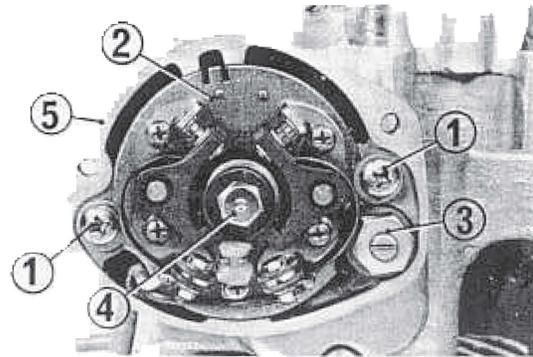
(1) Base plate locking screw (4) Spark advancer bolt
